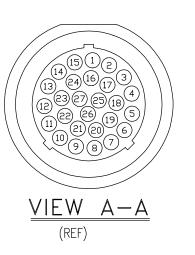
Synchronous RS-232 DTE Data Cable Assembly (10535-0780 Rev. –)
